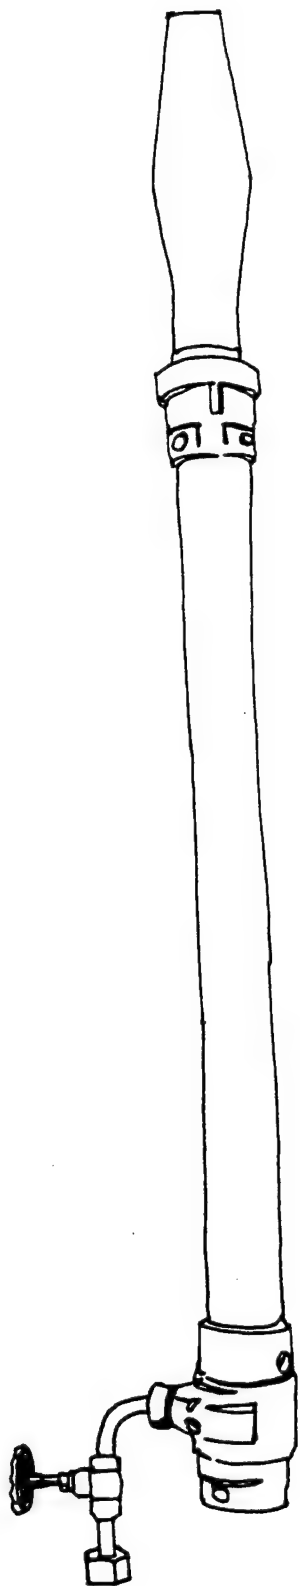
Hydro-Mix Prewetting Nozzle Assembly.
